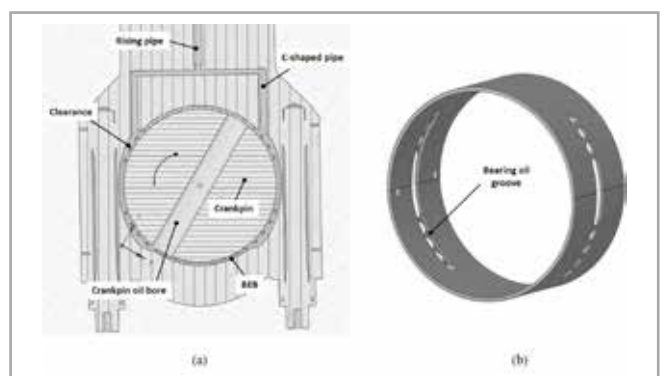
(a) Section of crankpin, BEB, connecting rod and C-shaped pipe. (b) BEB geometry.
